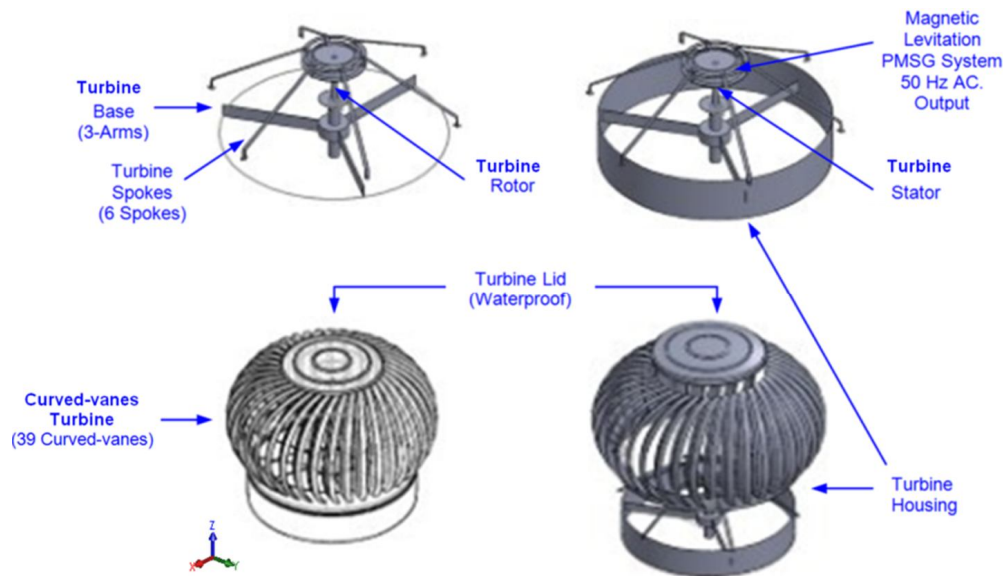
Engineering design of RTV prototype; 8 components (3-axis dimension)
